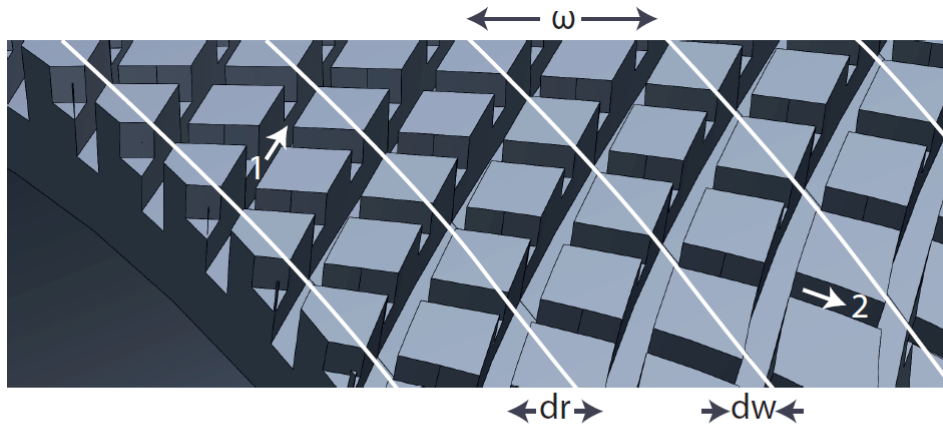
Close-up showing a CAD drawing of the surface geometry of the support cylinder for a sextupole shim coil prototype. To allow the layers to be wound on top of one another the slots into which the wire is wound are of different depth.
